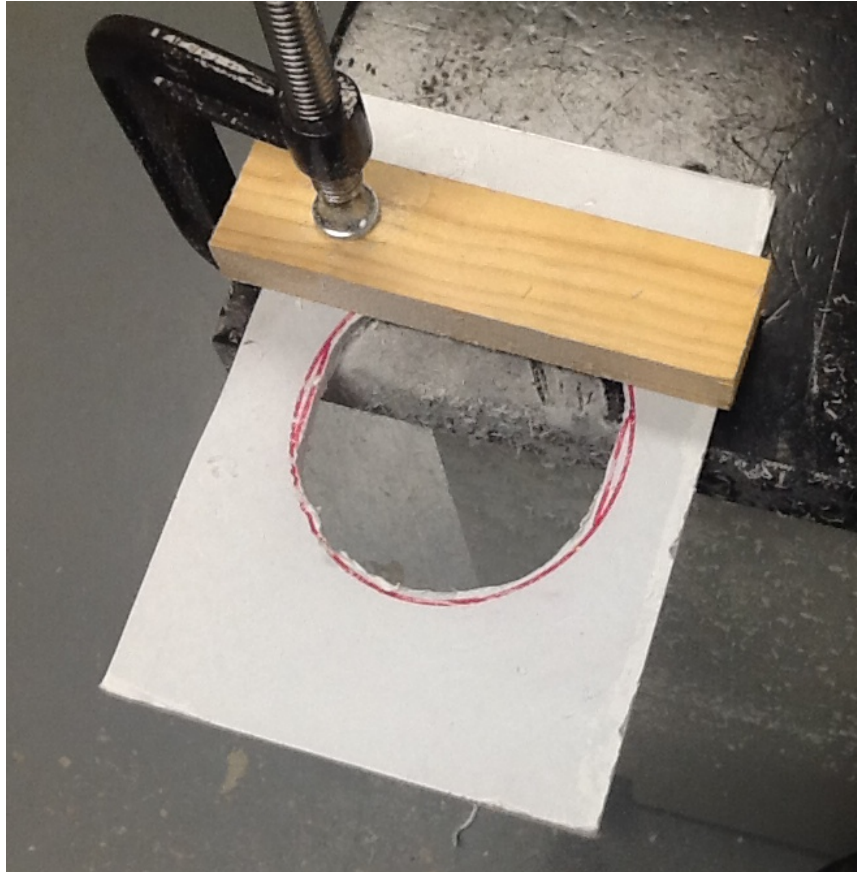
Humidity chamber fabrication step 1. A hole (4" longest diameter, 3.75" shortest diameter) was rough cut into a rectangular piece of polycarbonate sheet using a jigsaw, and then finished with a sanding drum mounted in a Dremel™ tool. The outside corners were later rounded using the Dremel™ tool. This piece served as a firm surface to both seal and attach the 4" angled dust port.
